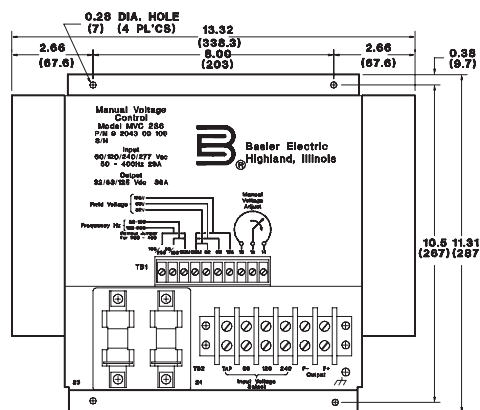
MVC 112 Dimensions in Inches (Millimeters)
